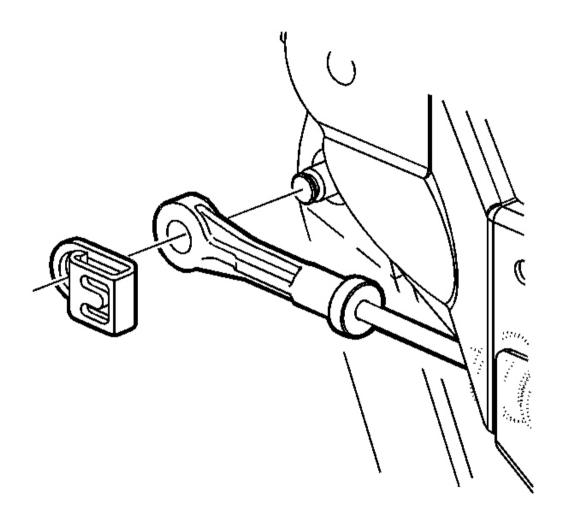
Clutch Pedal Retainer Courtesy of GENERAL MOTORS CORP.
